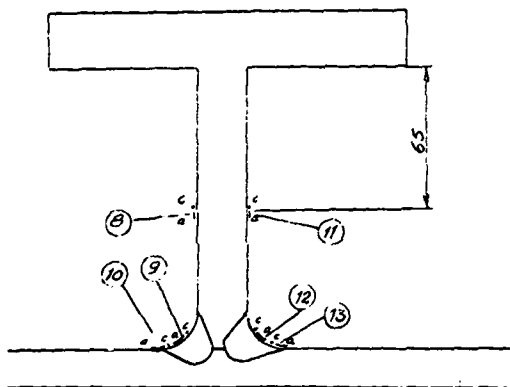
Strain Gauge Location of an Imperfectly Penetrating Weld.
